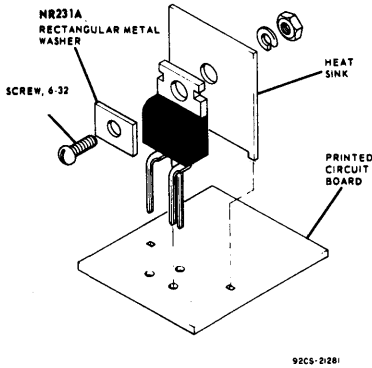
Method of mounting RCA VERSAWATT packages on printed-circuit boards.
